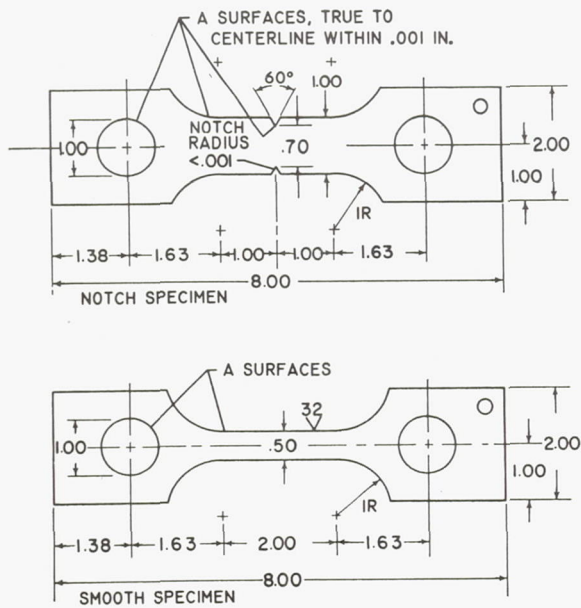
Smooth and sharp edge notch sheet tensile specimens.
